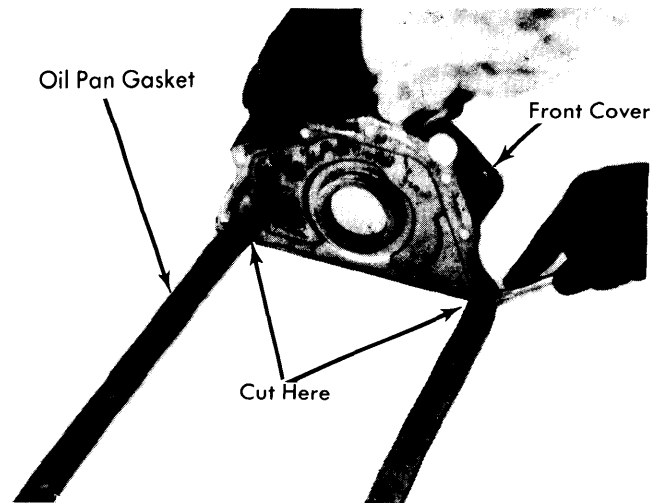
Fabricating Front Cover-to-Oil Pan Gasket by Cutting a Section from NEW Oil Pan Gasket
